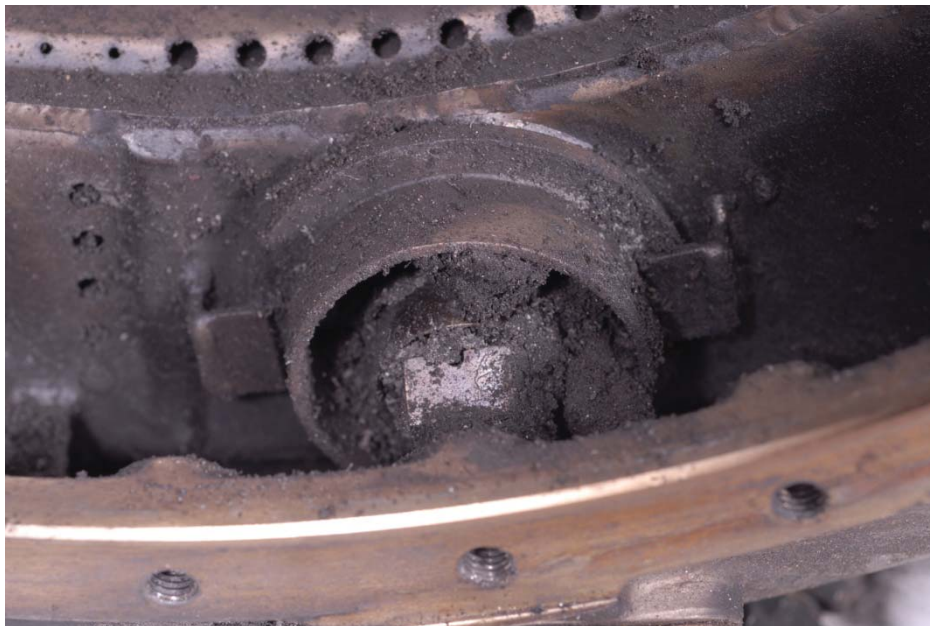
P-79001C, De-swirl Vane Assembly, Earthen Debris
